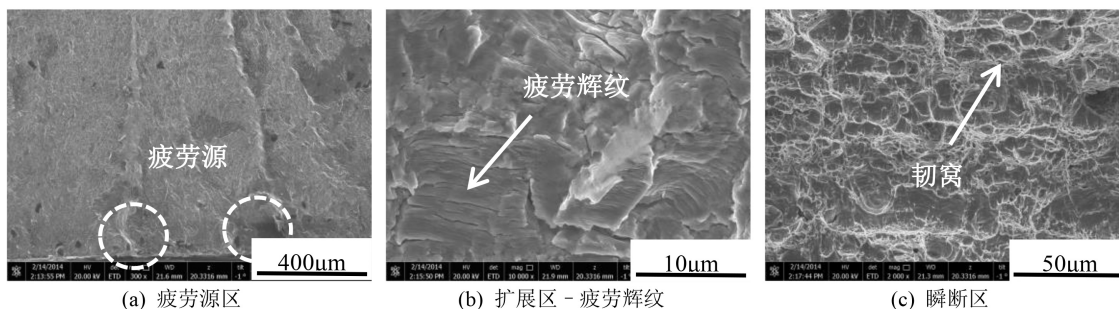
SEM morphology of the fracture surface of the as-welded joint fatigue specimen
